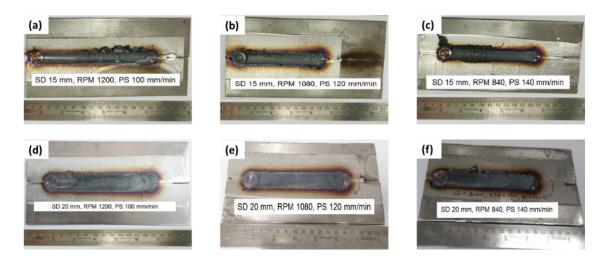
FSP of gas metal arc welded plate S7 at different processing parameters.
